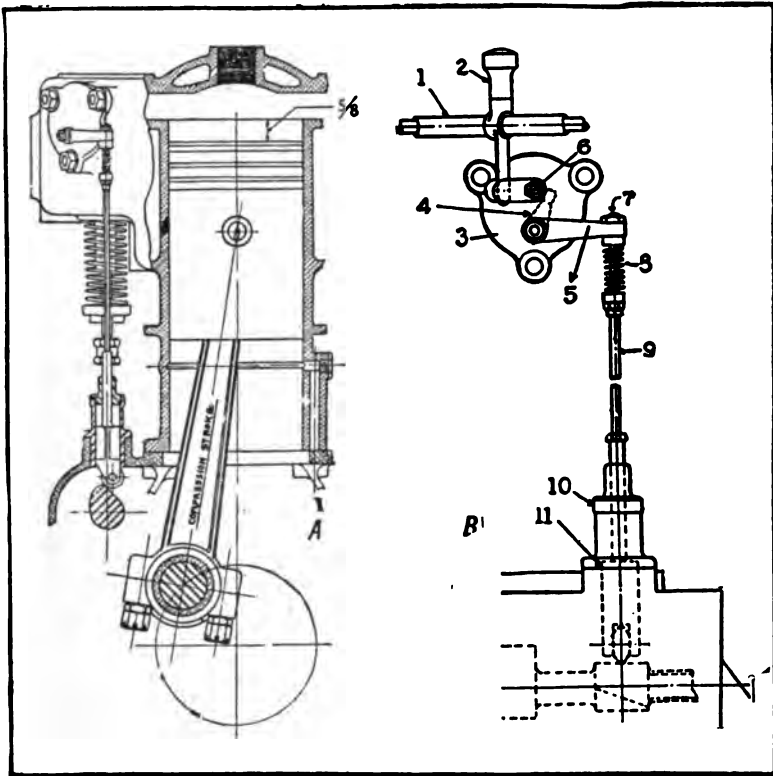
Showing action of Locomobile low-tension igniter plate.
